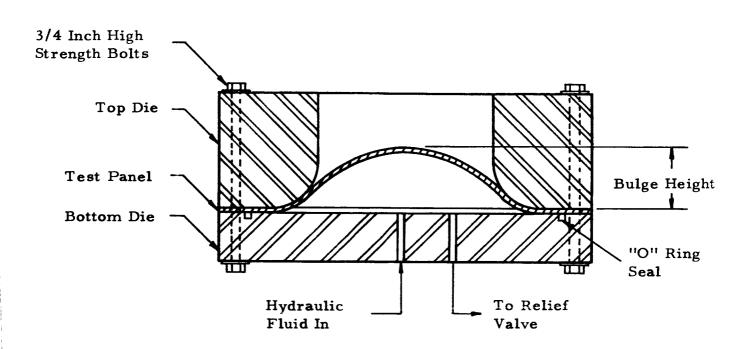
SCHEMATIC DIAGRAM OF HYDRAULIC BULGE TEST FIXTURE
